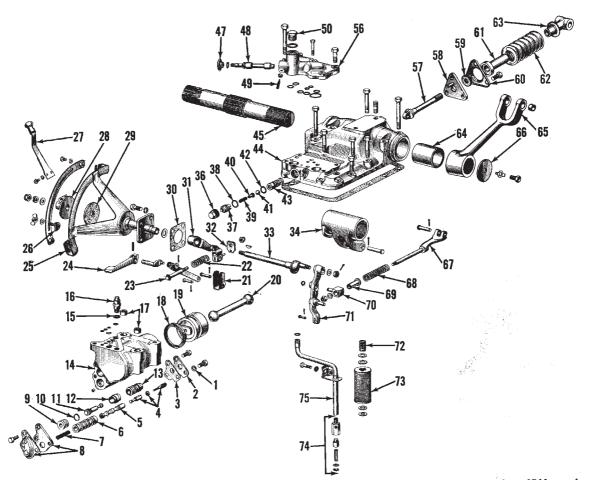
Exploded view of early Fordson Dexta hydraulic lift cover, cylinder and linkage. Accessory plate (56) can be replaced with flow control valve (54—Fig. FO564) if complete valve and linkage are used. Although component parts are different, complete lift cylinder assembly (14) is interchangeable with later type complete lift cylinder assembly (14A — Fig. FO564). Fig. F0564).
